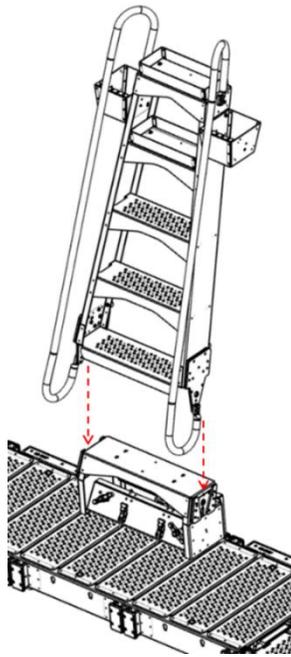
Install quick-pins into guardrail receivers of platform.
